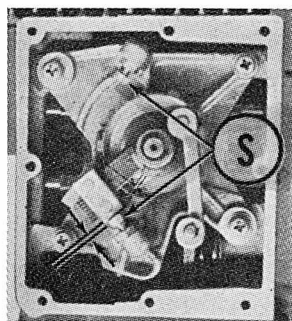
Gear change stop bolts (S) should have approximately 1MM clearance when stop ball engages detent in shifter cam.
